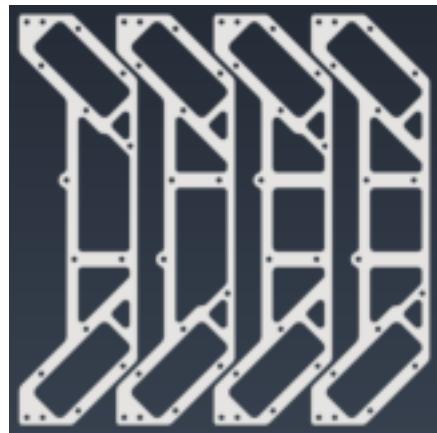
Completed CAD for Machined Aluminum Chassis Pieces
